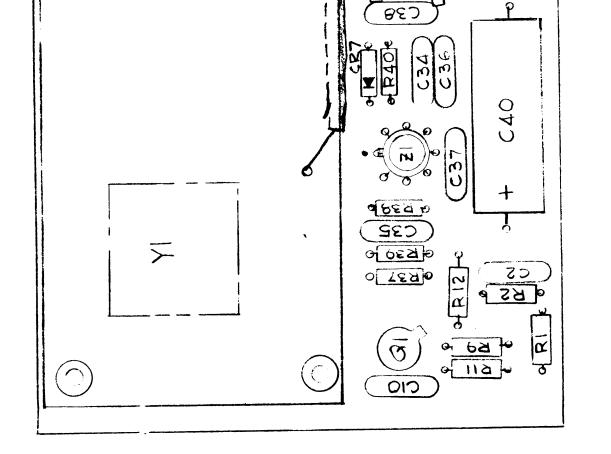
Sync/AFC Assembly Z117, Location of Components
